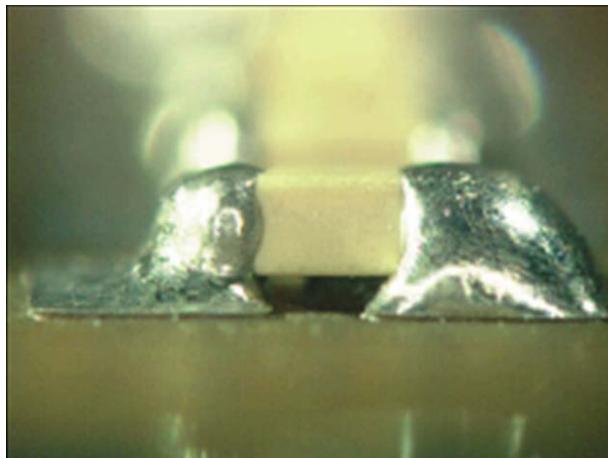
Unacceptable, excessive solder (see also Table 11-1)
